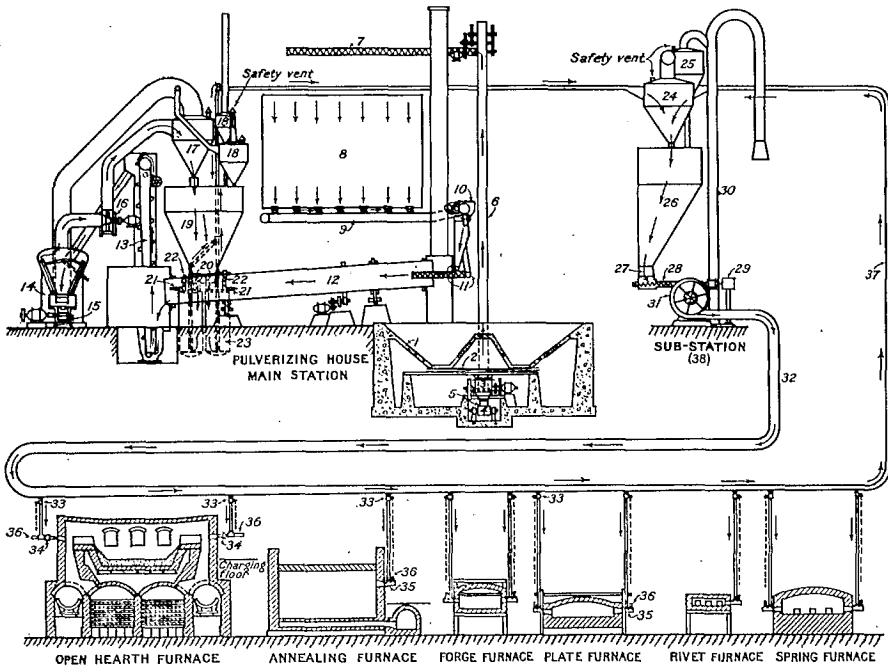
General arrangement of a powdered coal system with sub-station, Installation in plant of Pressed Steel Car Co., by Bonnot Co.
